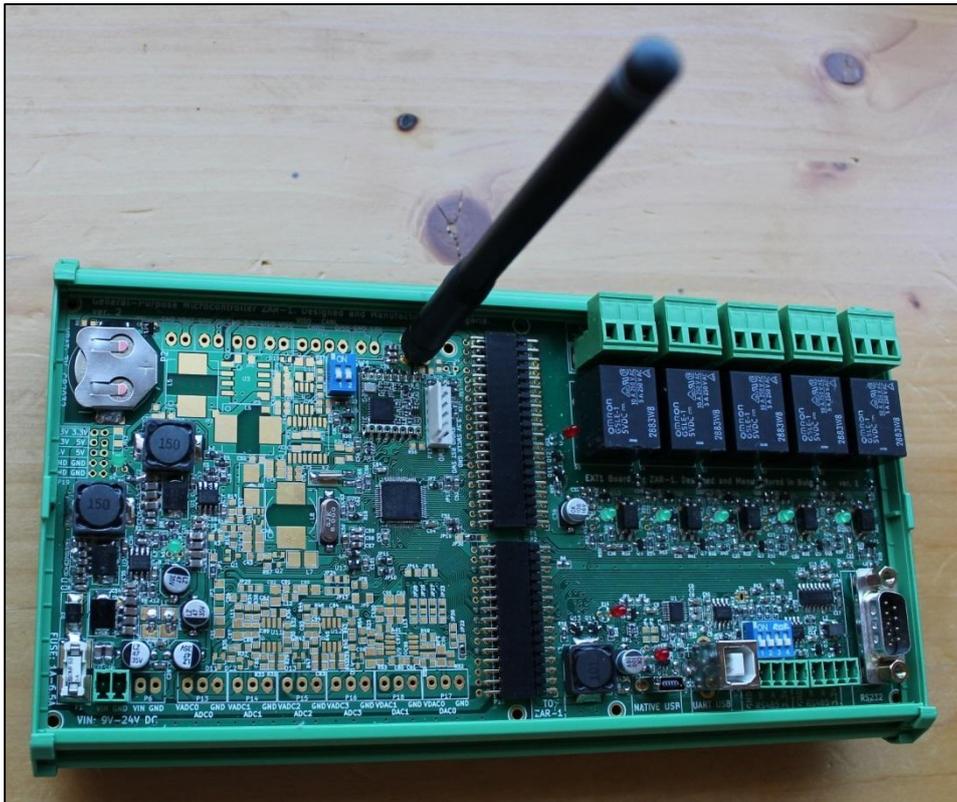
Partially populated base board together with an extending board mounted in the DIN-rail enclosure
